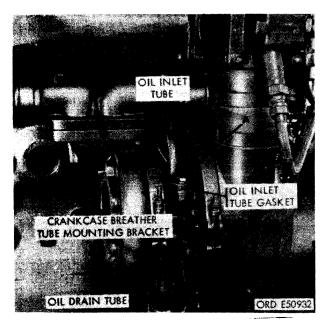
REMOVING OR INSTALLING TURBOSUPERCHARGER ASSEMBLY (LATE MODEL ENGINES).
